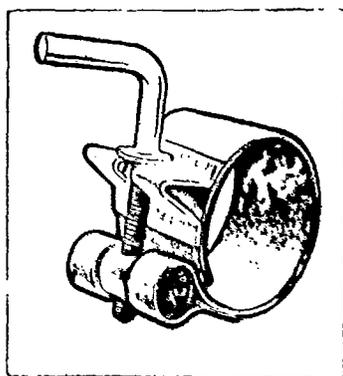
Model 2494 Device for Installation of Piston With Rings Into Compressor Cylinder
